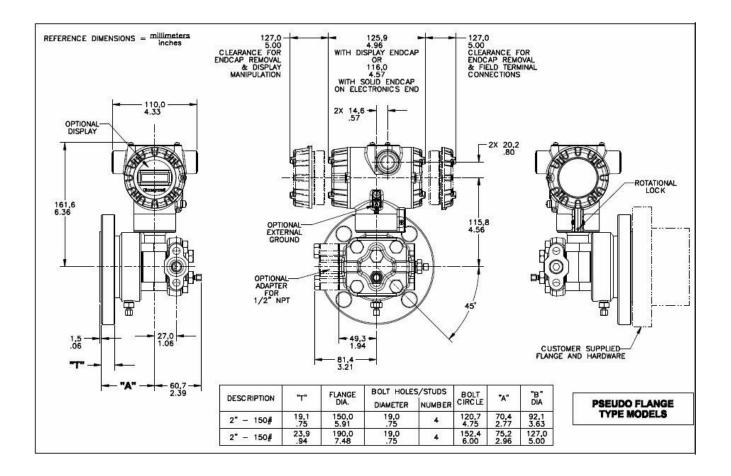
Typical mounting dimensions for pseudo flange type models STF72F, STF73F, and STF74F.
